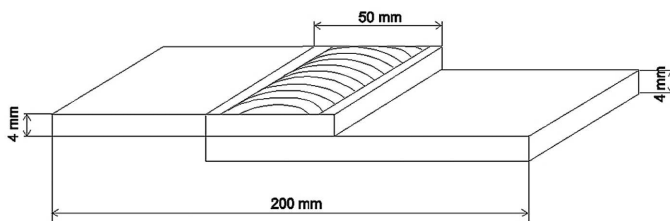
Scheme of 8 mm thick FSW lap test joint
